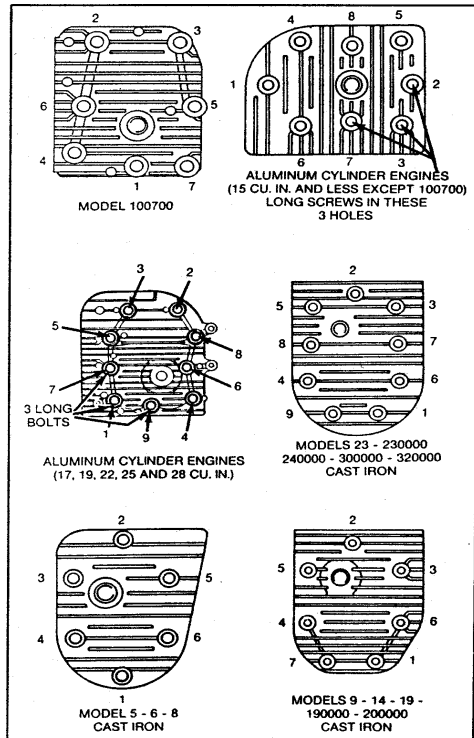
, Torque Patterns for Cylinder Head Bolts
